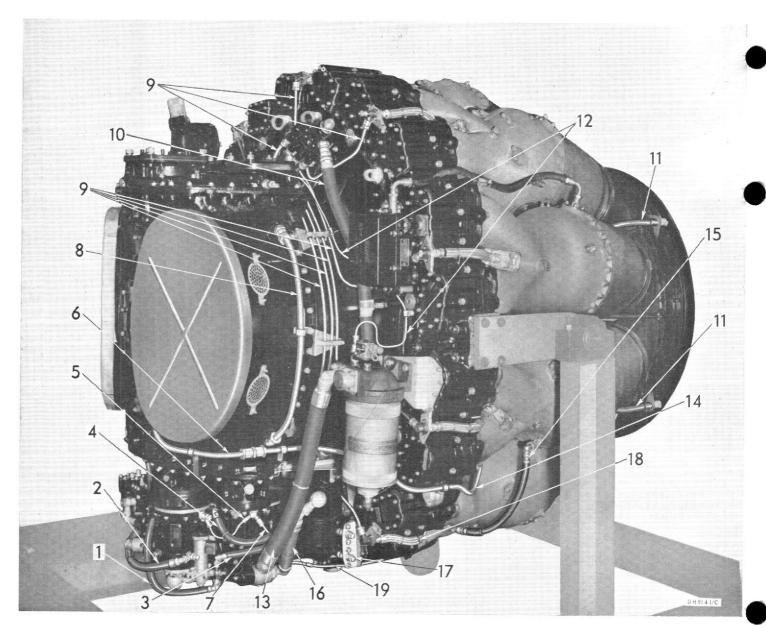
Disposition of pipes on port side of 48 Mk. 1 engine.
